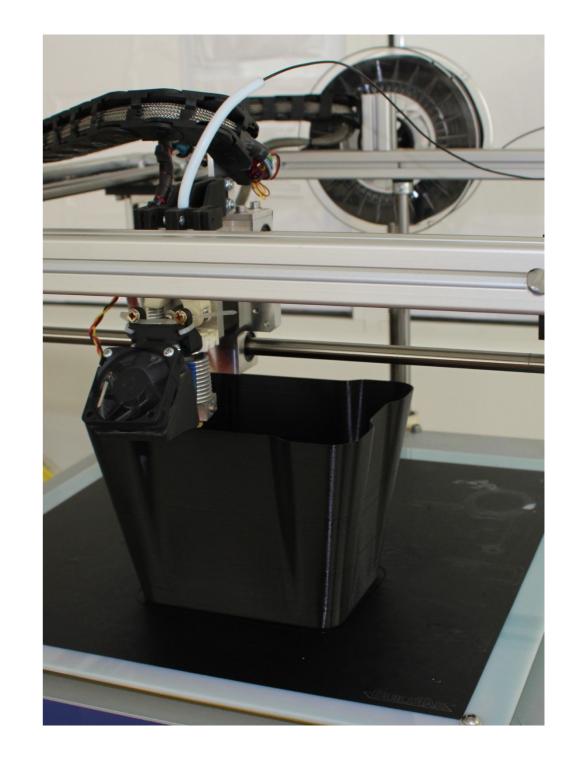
3D printing on a special sheet to improve adhesion. Source: Ludor Engineering
